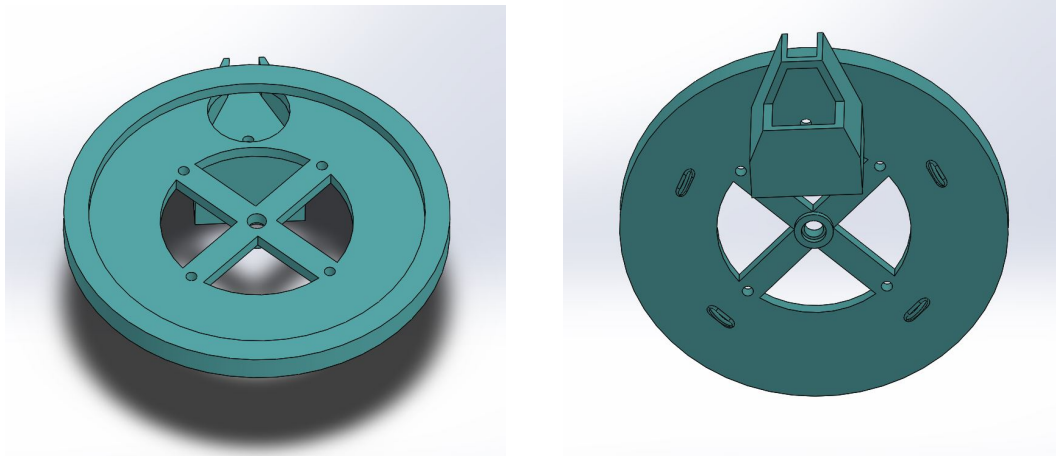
Top and bottom views of the pill tray ring supporter CAD images.
